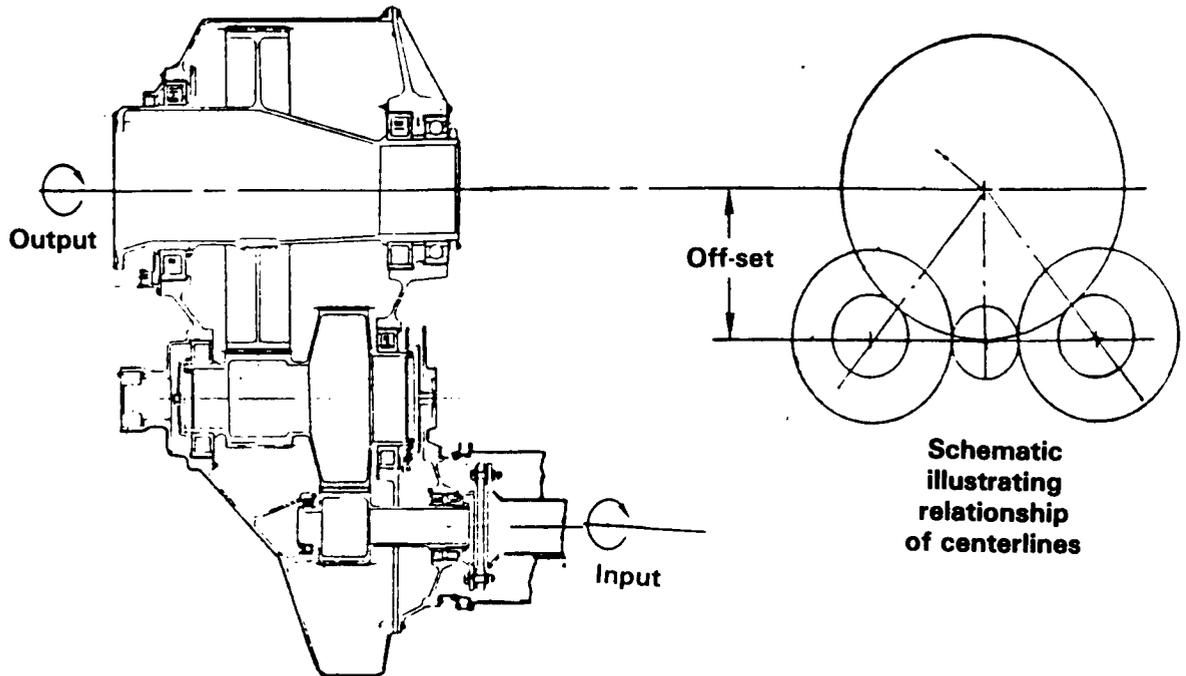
Compound Idler Offset Reduction Gear - This system features a minimum number of gears and bearings. (J27638-905)
